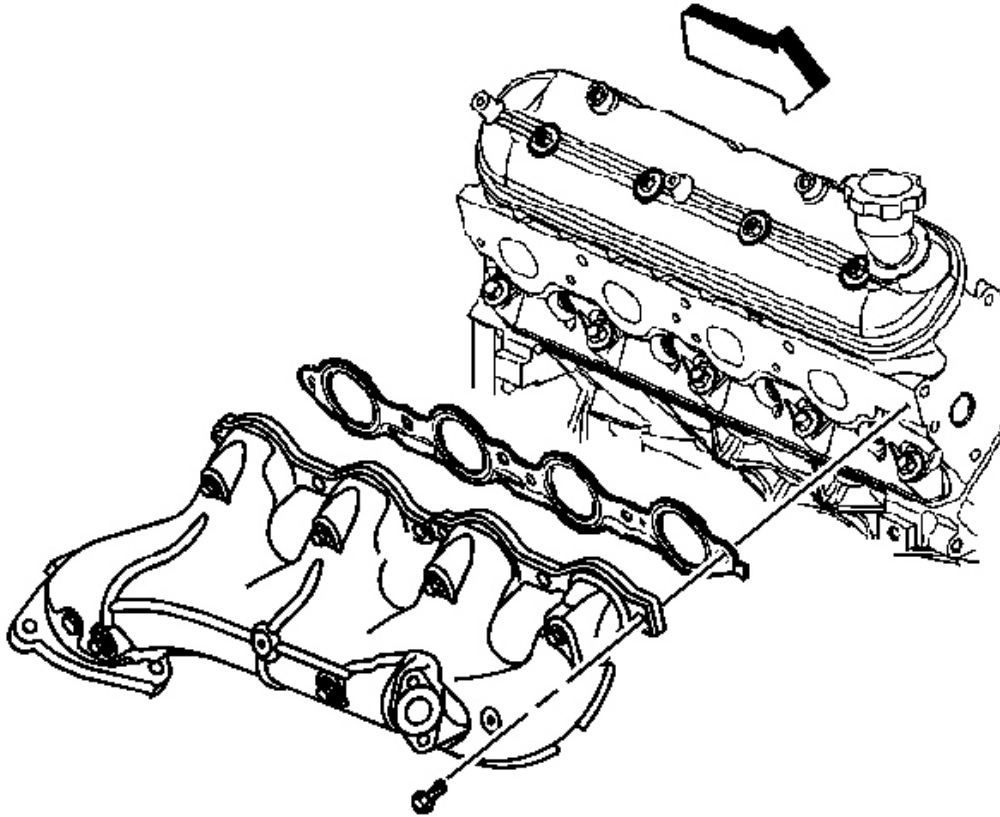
Installing Right Exhaust Manifold & Gasket - 5.3
